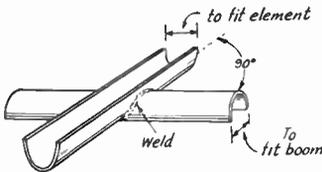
The clamp for the driven element is made by splitting 1-foot lengths of iron pipe and welding them as shown.
